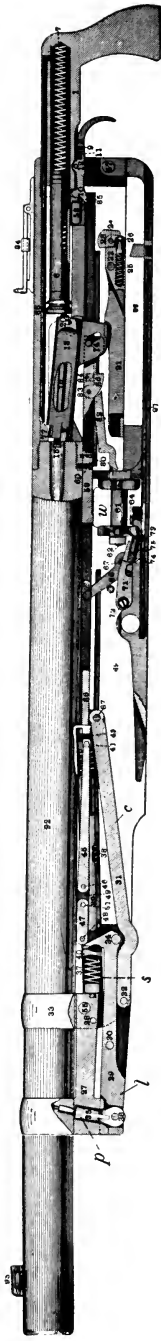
Colt .30-Caliber Automatic Machine Gun.
